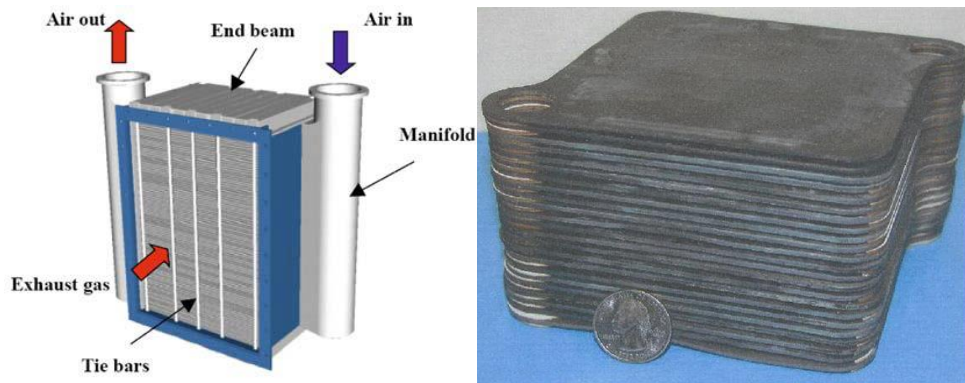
Rectangular shape PSHE examples, (a) RSAB recuperator [32], (b) and Ceramic micro-channel gas turbine recuperator module [12].
